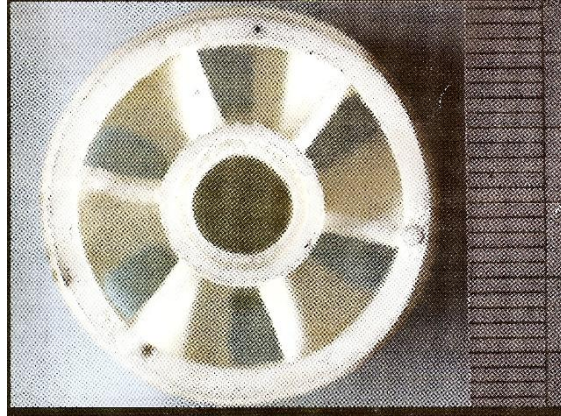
Mechanical Component Manufactured Using Inkjet Printing Technology⁷
